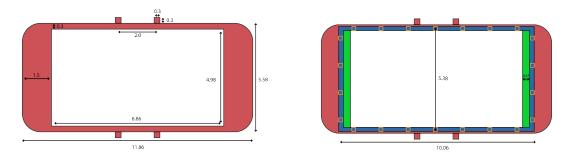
Design of *part A* for the first prototype. The unit used is [cm]. The size of the interacting area is $8.86 \times 4.98 \ cm$, imitating a 4-inch smartphone display. A small margin of $0.3 \ cm$ is left on the upper and the lower part to give room to the $0.2 \times 0.2 \times 0.8 \ cm$ LEDs (orange squares). A bigger margin of $1.5 \ cm$ is left on the sides for the user to be able to grip the device. On the left: Front of the prototype, where the camera will be recording. On the right: Back of the prototype, where the interaction will take place. A recess of $9.66 \times 5.38 \times 0.8 \ cm$ (blue and green region) is left for the LEDs, which will be covered afterwards to keep an interaction area of $8.86 \times 4.98 \ cm$ and to give the user tactile feedback of the borders. The green area shows the regions of the recess where the plate will be glued afterwards. The prototype is $0.9 \ cm$ thick.
